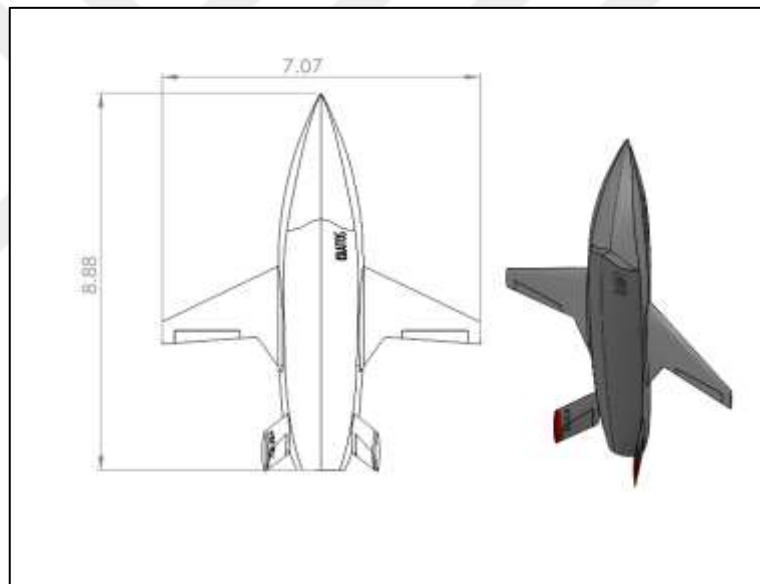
Kratos XQ-58A Valkyrie Drawing That Clarifies Dimensions.
